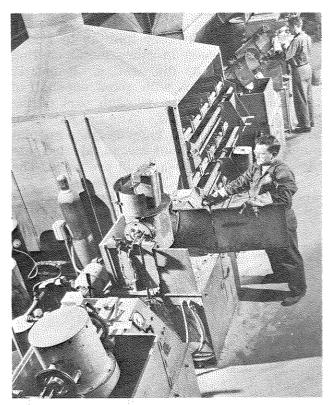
Range of casting furnaces on each side of mold cooling hood.
